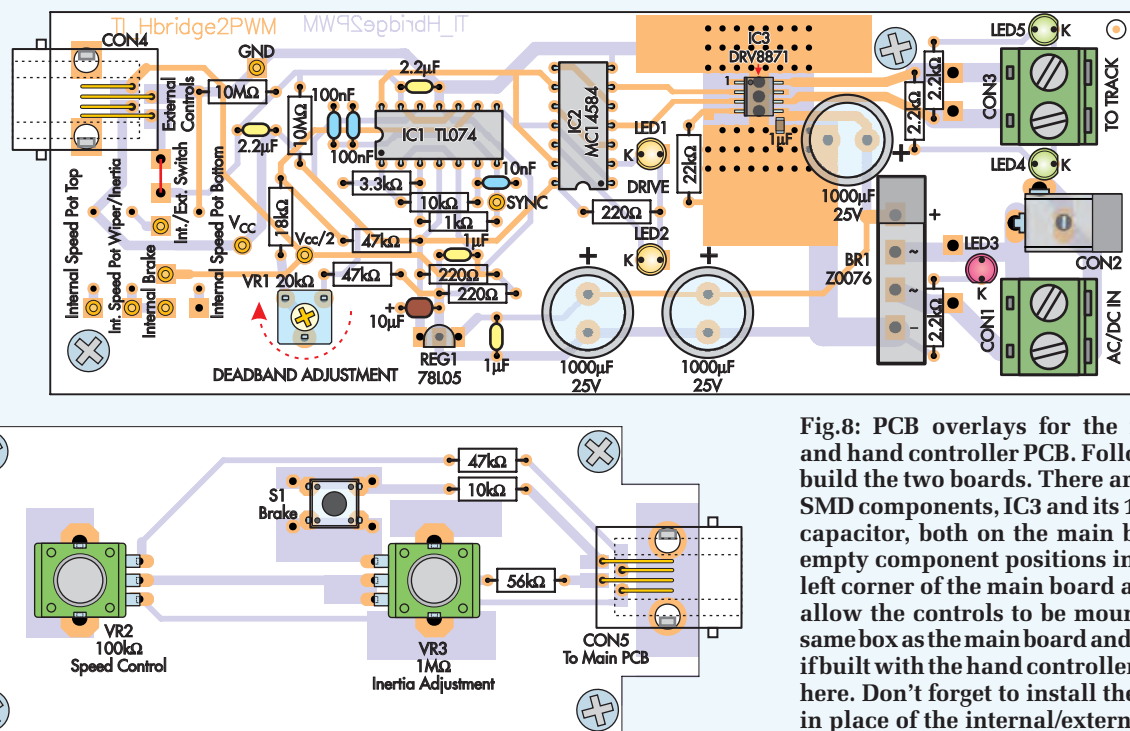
PCB overlays for the main PCB and hand controller PCB. Follow these to build the two boards. There are only two SMD components, IC3 and its 1 $\mu$ F bypass capacitor, both on the main board. The empty component positions in the lower left corner of the main board are there to allow the controls to be mounted in the same box as the main board and are left out if built with the hand controller, as shown here. Don't forget to install the wire link in place of the internal/external switch.
